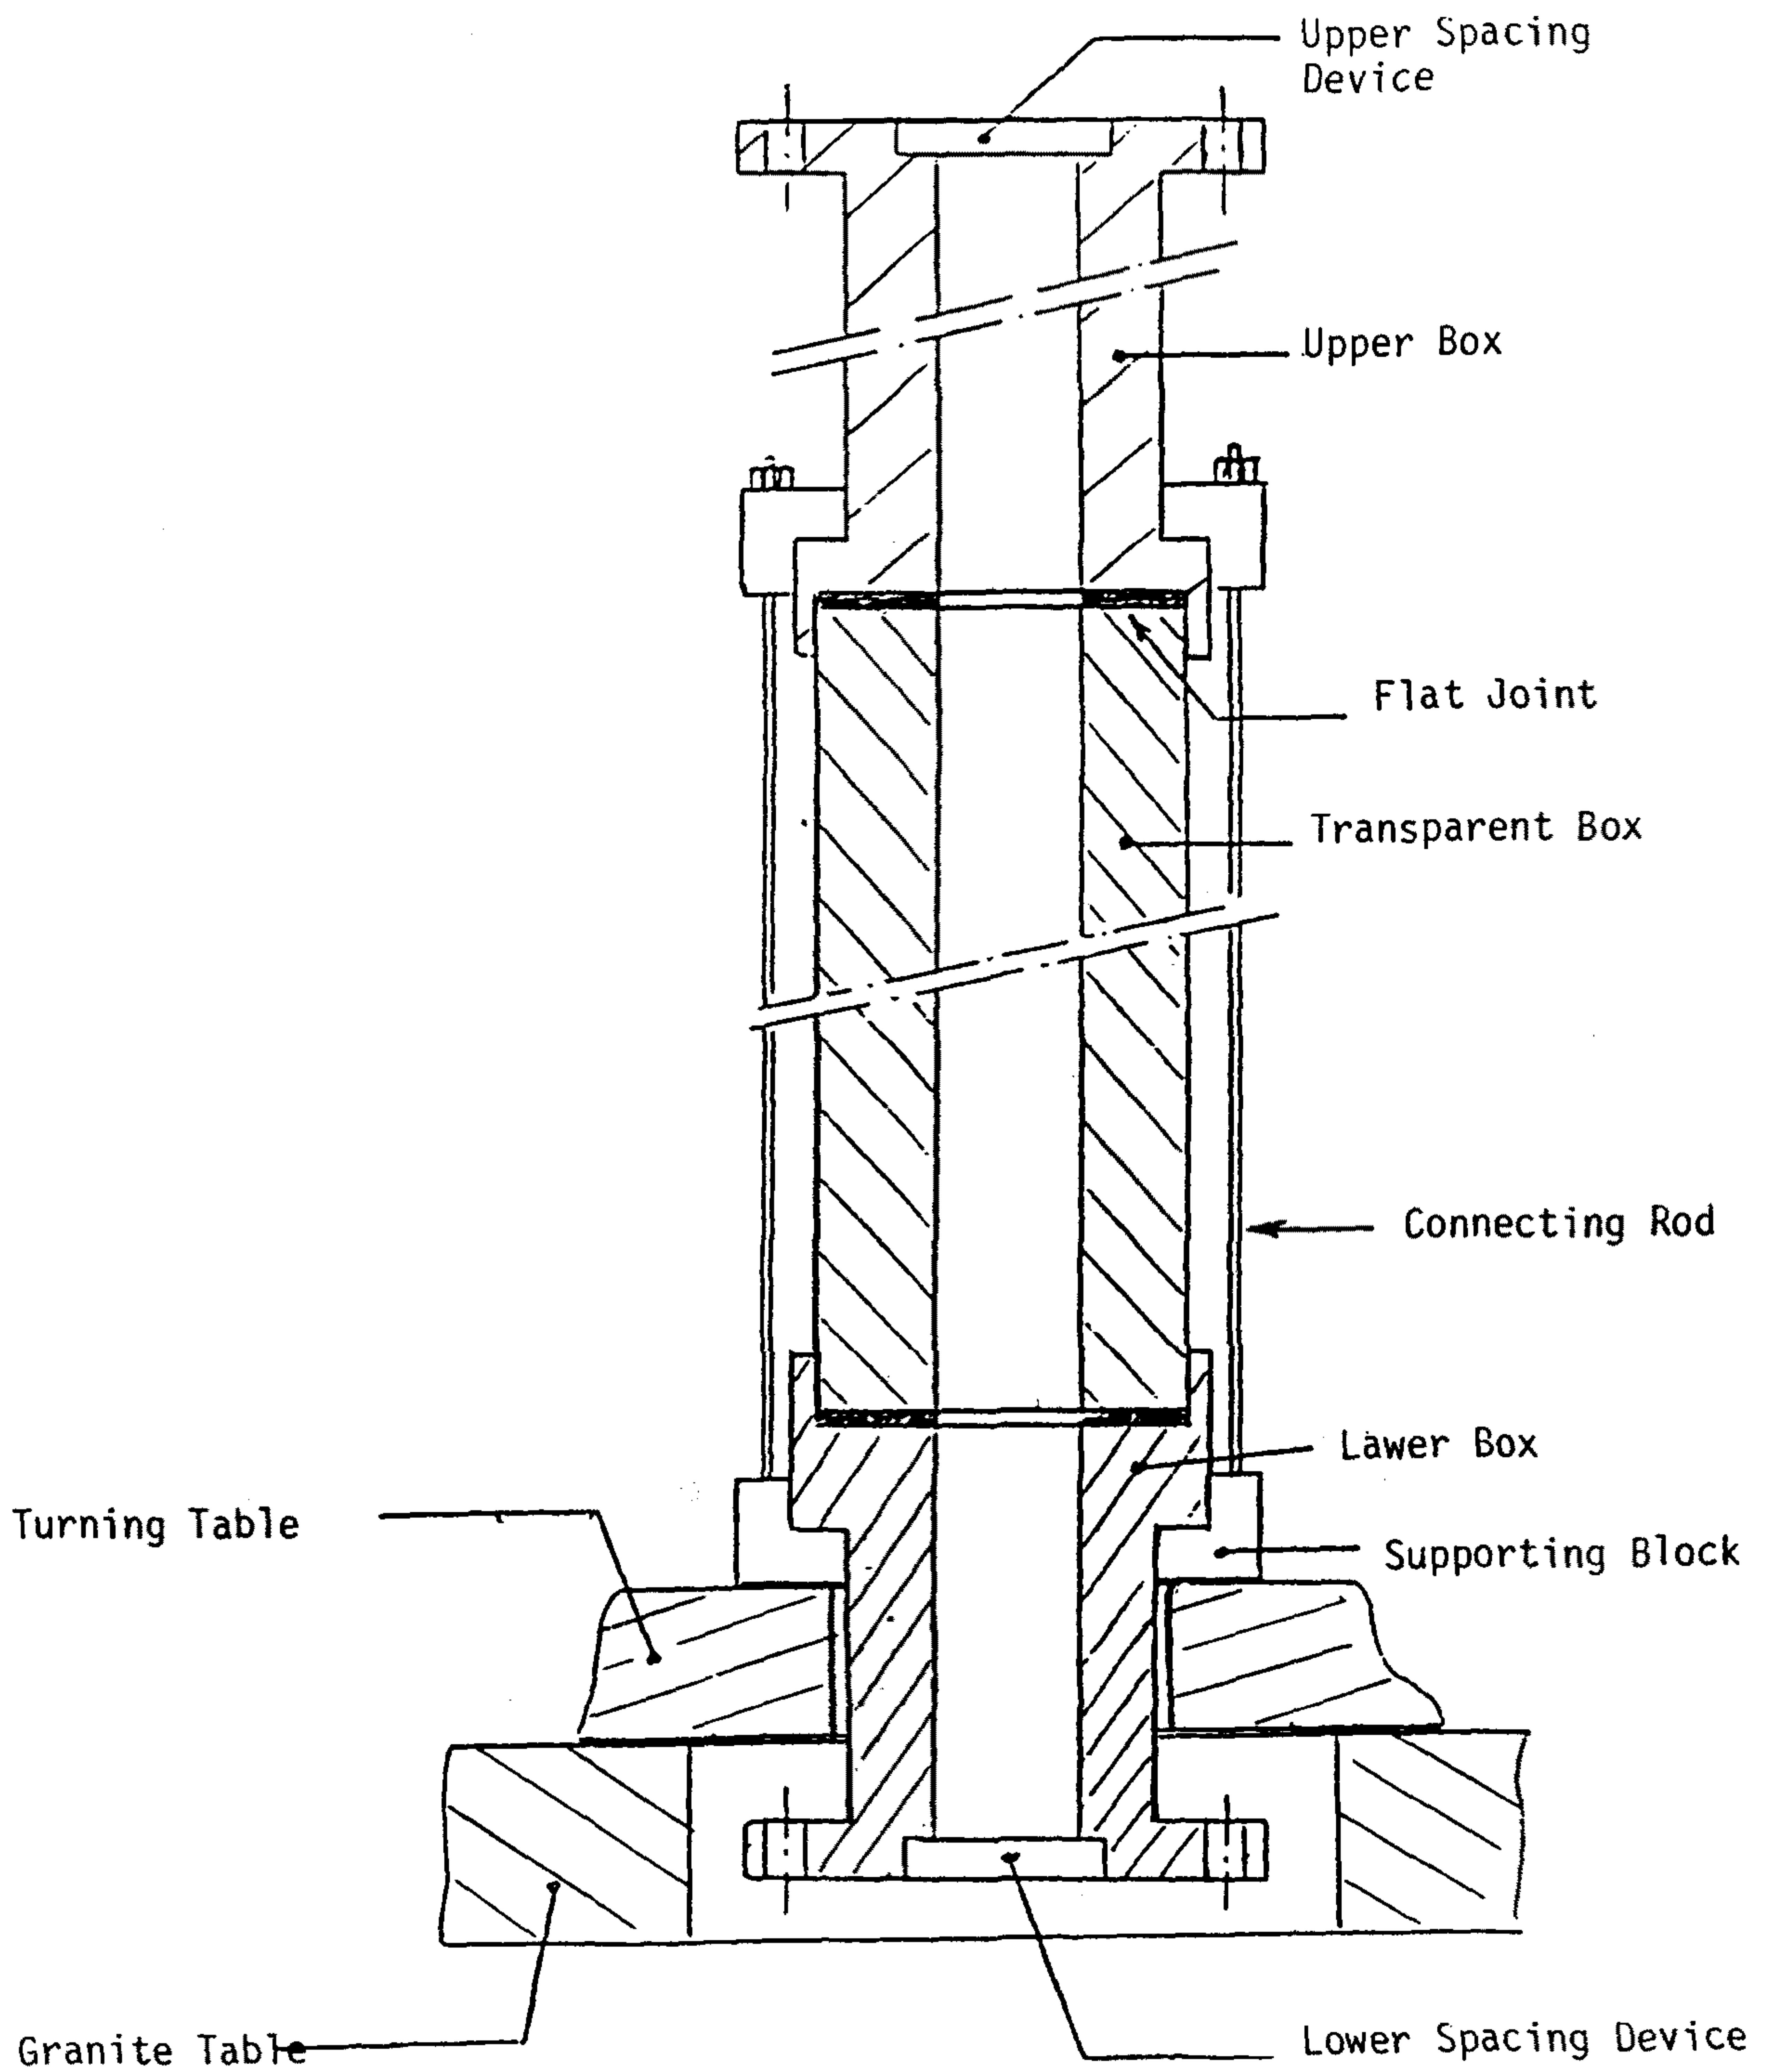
Assembly of the Test Section (HYDROMEL-Laser)
